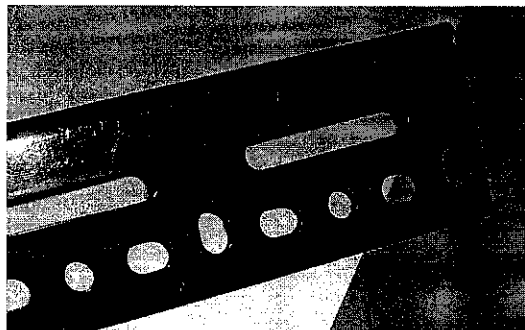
L-SHAPE CONSTRUCTION METAL
